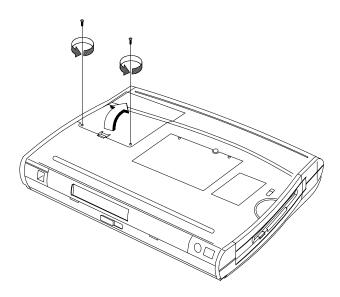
Removing the Hard Disk Drive Bay Cover
